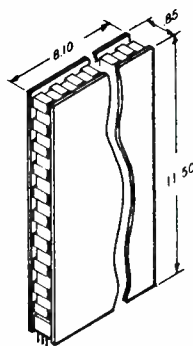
Logic-on-card package of 460 micromodules in interconnecting printed-circuit boards.
